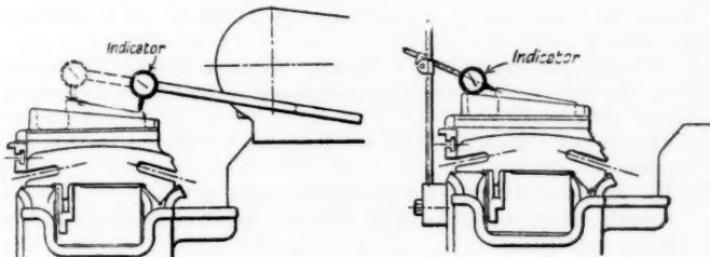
, c.—Parallelism of grinding machine tables with ways (b)—table with bed (c) master edge with table.
